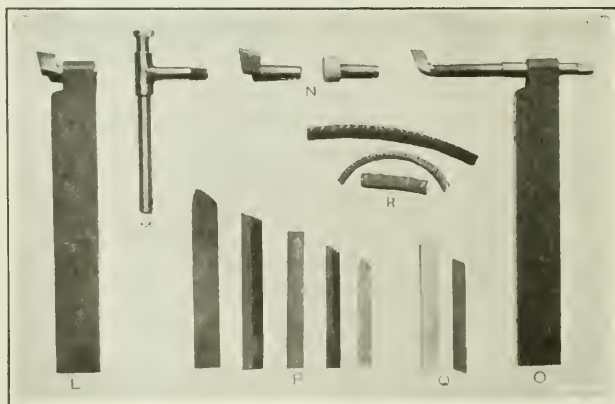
"Super" Tool-holder and Tool Bits and Diamond Laminated and Solid Tool Bits
